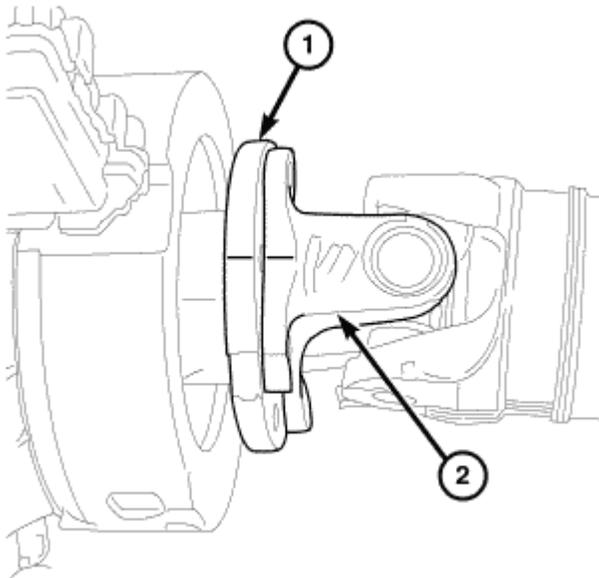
Identifying Transmission/Transfer Case Flange & Propeller Shaft Flange
